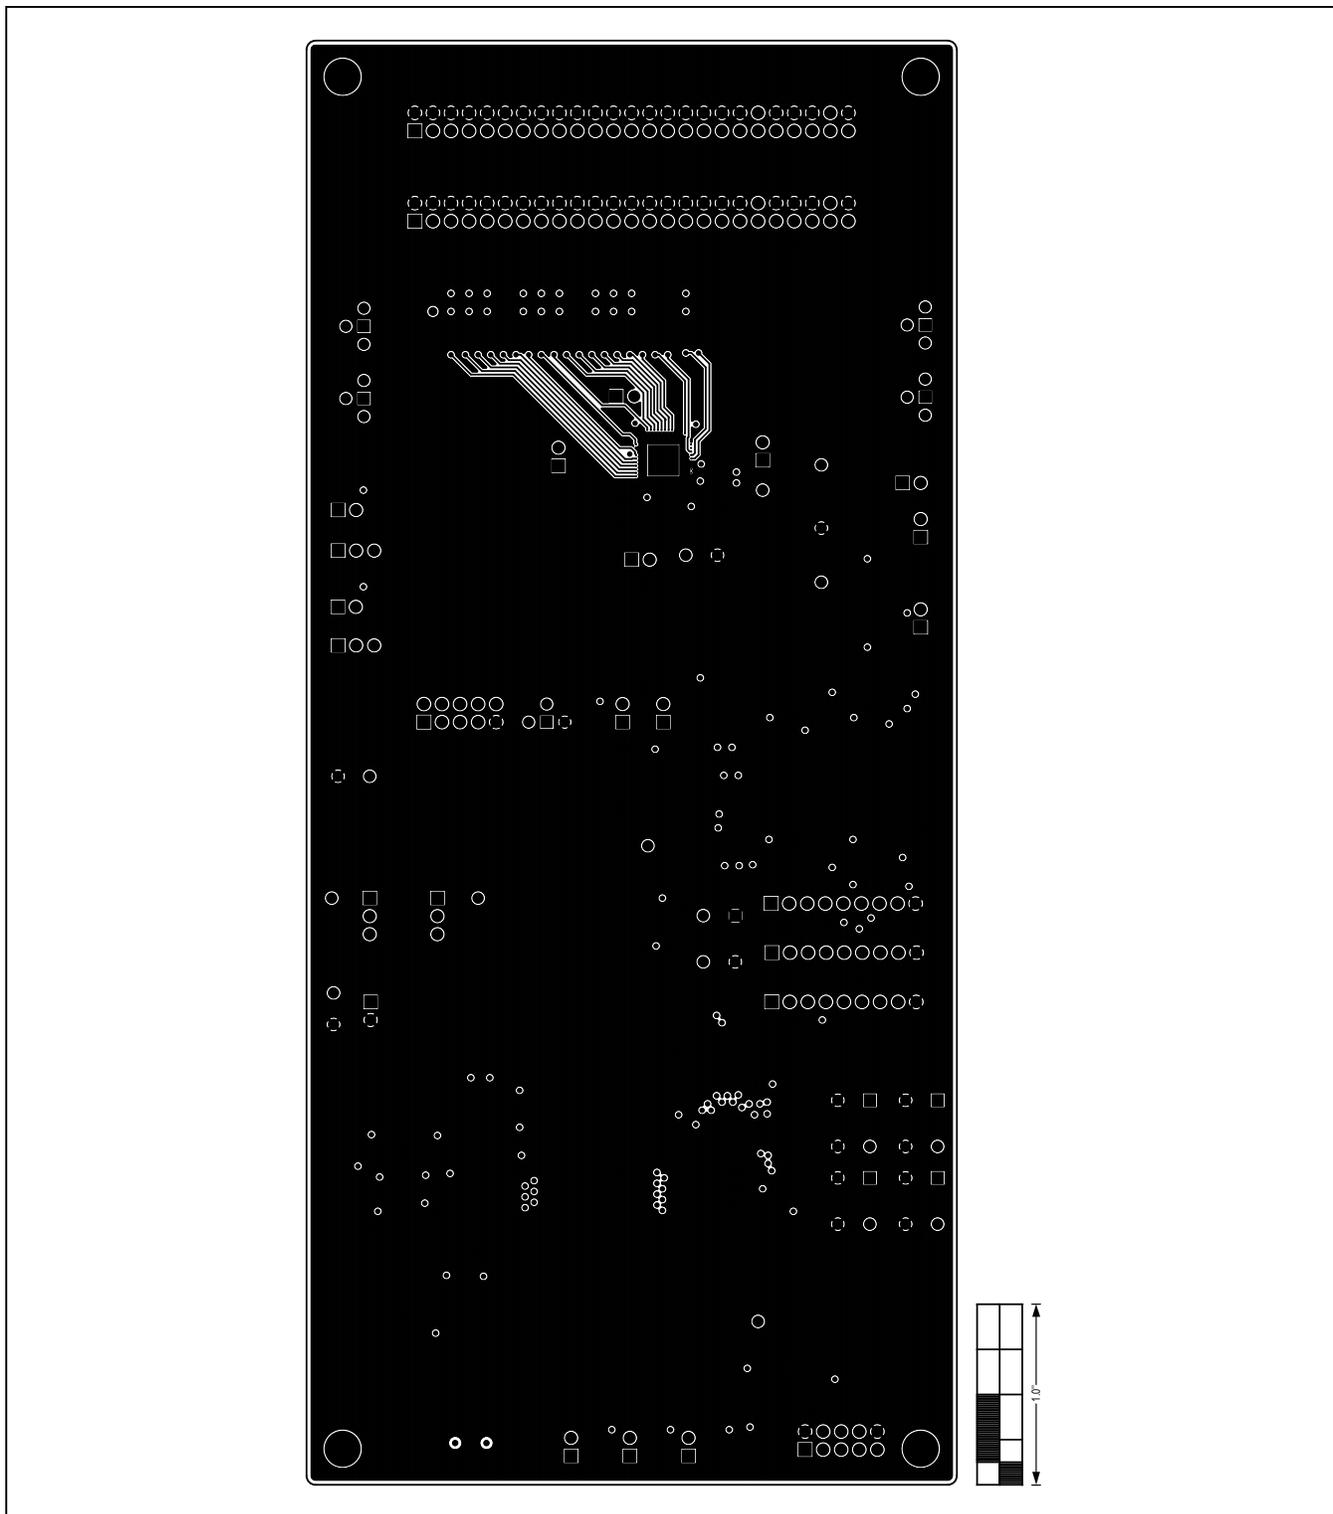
MAX11300 EV Kit PCB Layout—Ground Layer 2
